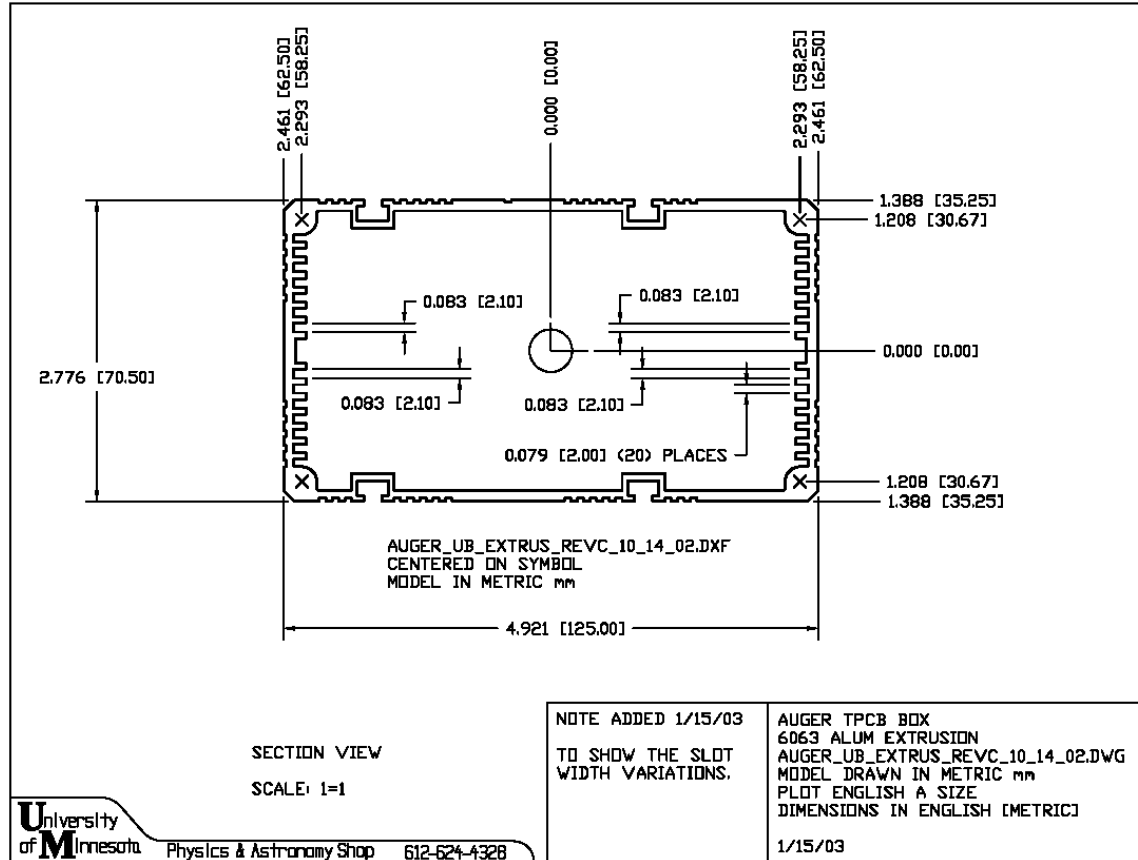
Pierre Auger Observatory TPCB extrusion print
